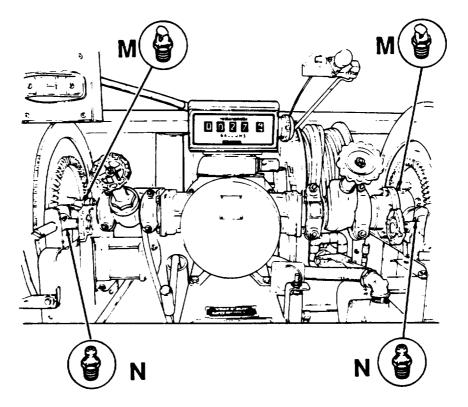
Location of Hose Reel Hand Crank and Hose Reel Side Bearing Lubrication Points (M970 and M970A1).
